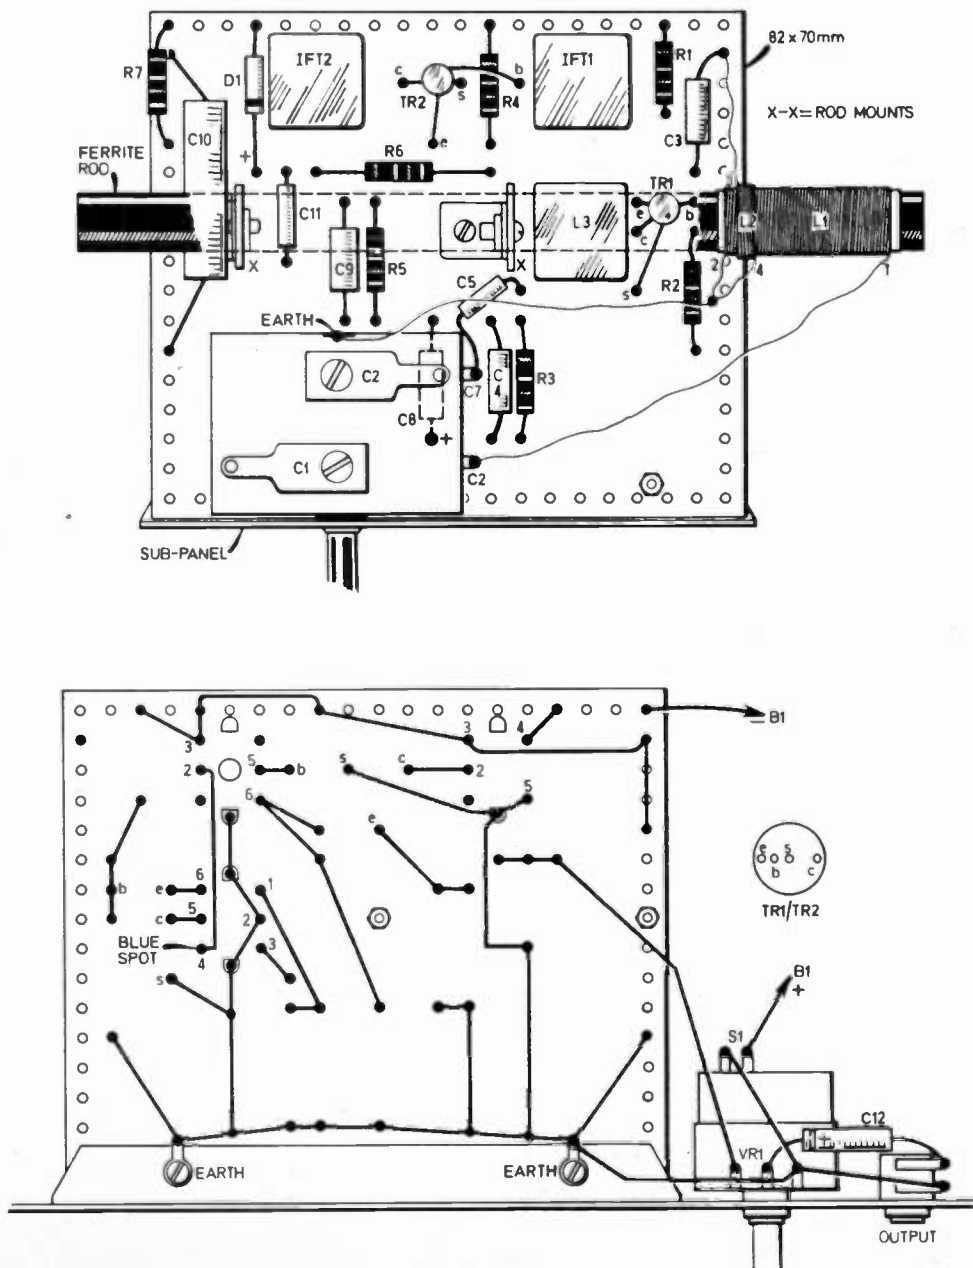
Complete wiring up and layout details on both sides of the component panel and case front panel.
